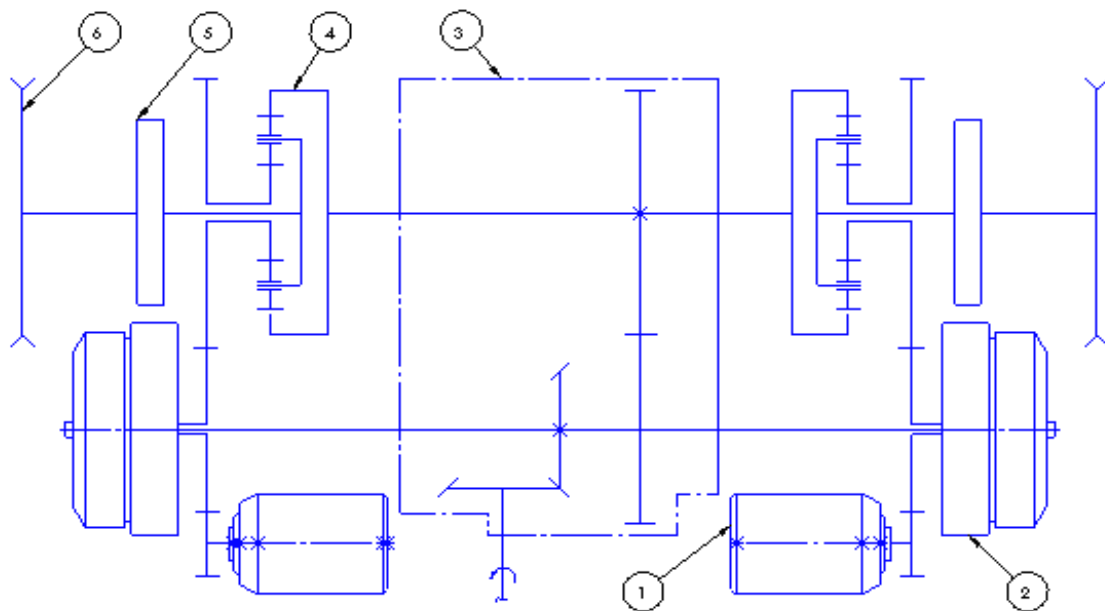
Kinematic scheme of transmission with two electric motors while maintaining the mechanical branch in the turning mechanisms: 1 – Electric drives; 2 – Native turning mechanisms; 3 – Gearbox; 4 – Summation planetary rows; 5 – Final drives; 6 – Driving wheels
